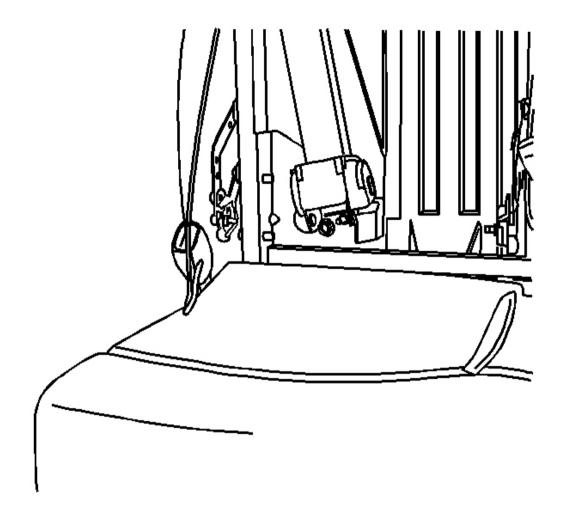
Seat Belt Retractor Nut Courtesy of GENERAL MOTORS CORP.
